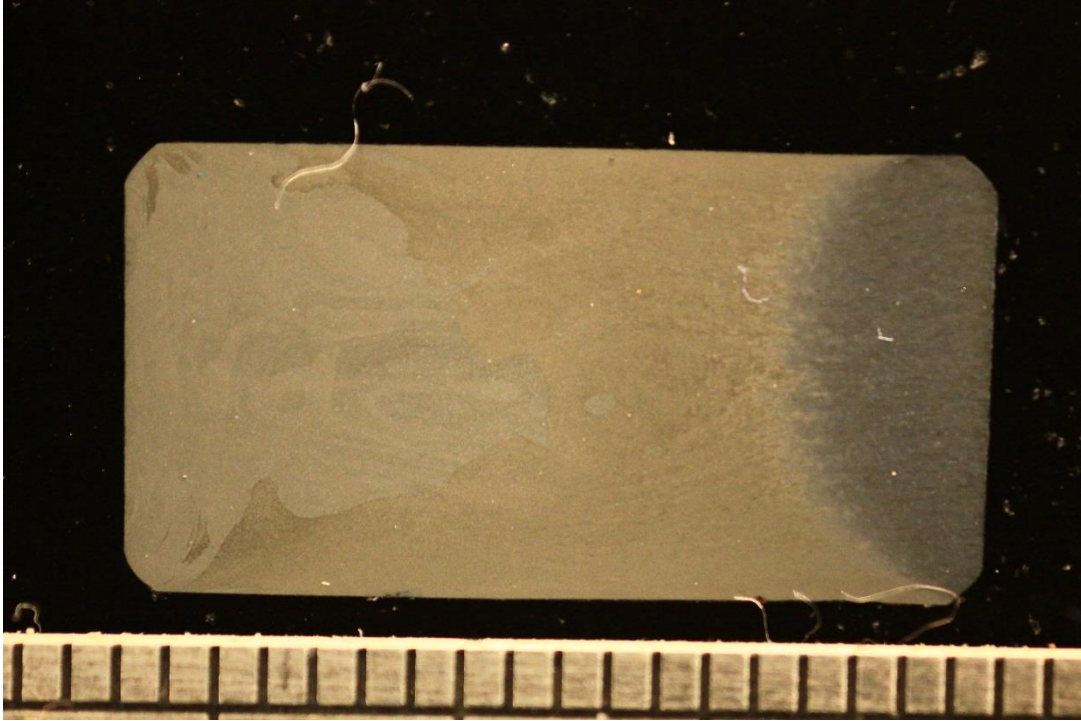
Macrograph of Weld 5 Sample 1
